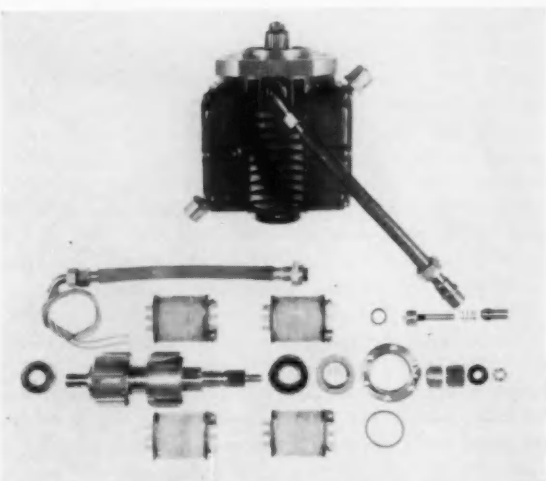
Redesigned DLN-10 magneto forged flange for R-2800 engine
